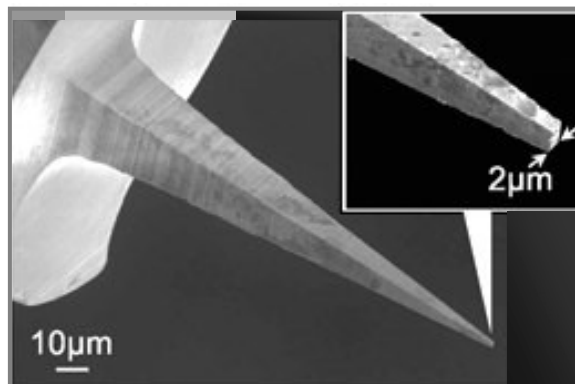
Microtool fabricated by electro-discharge grinding process [160].
